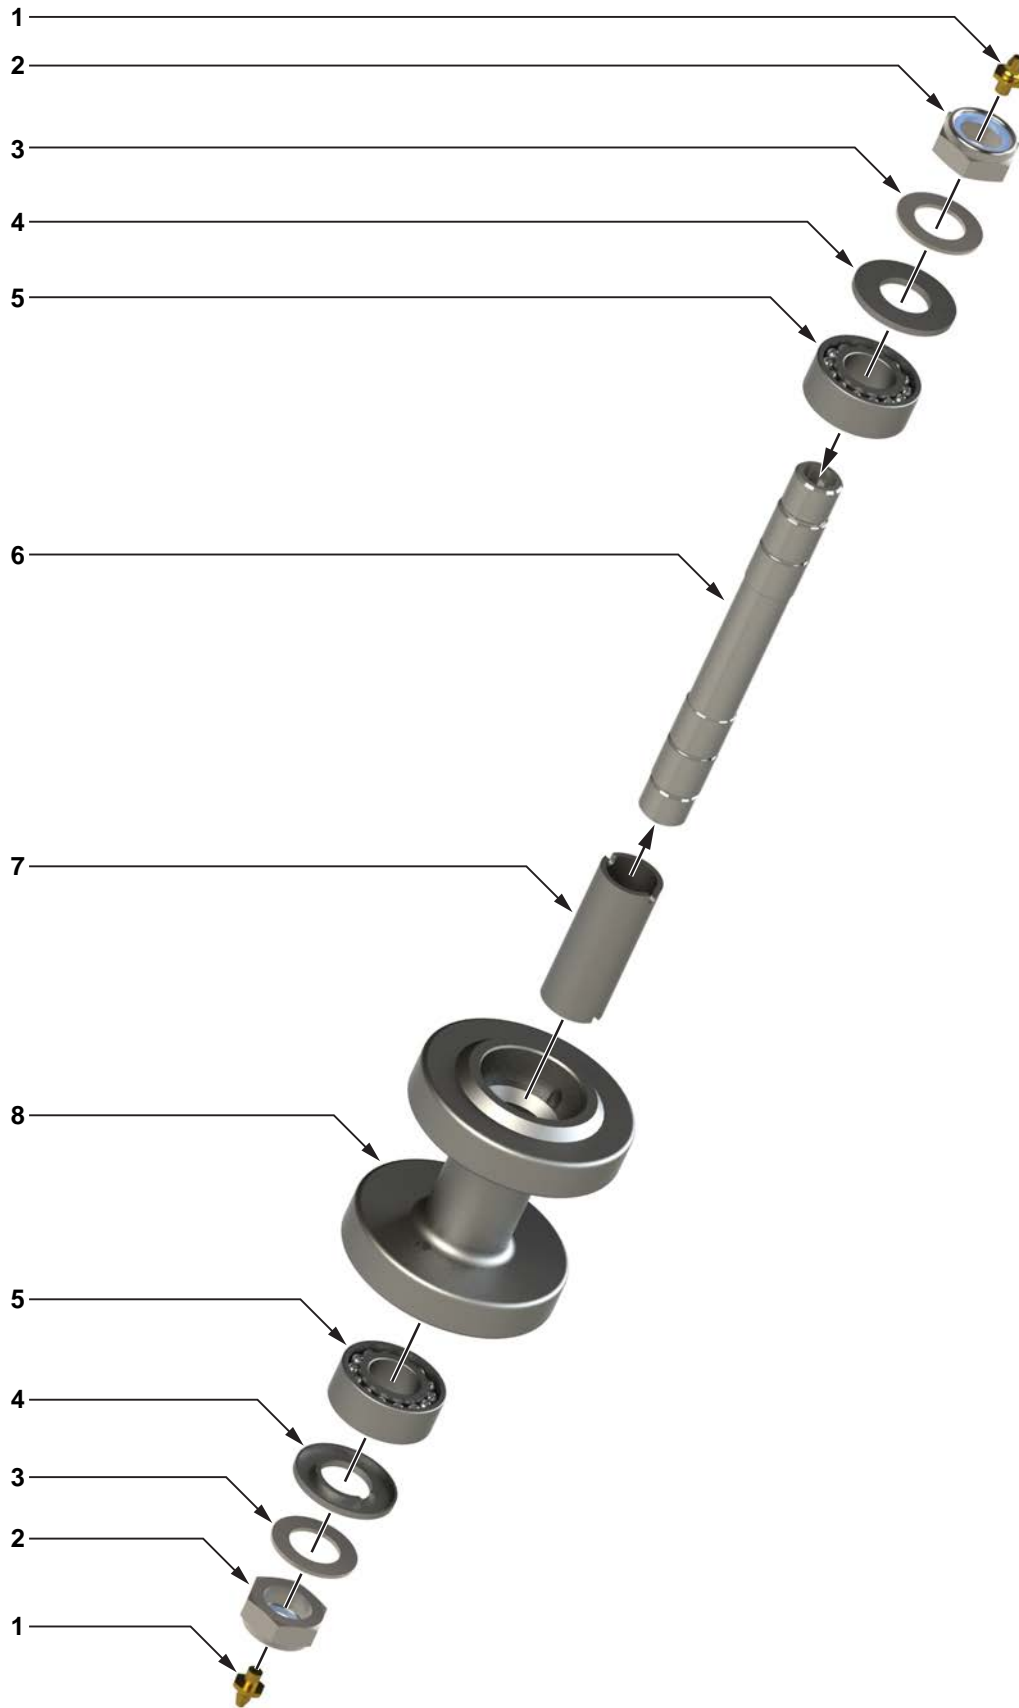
101-3201 HD31-80K Support Roller Exploded
